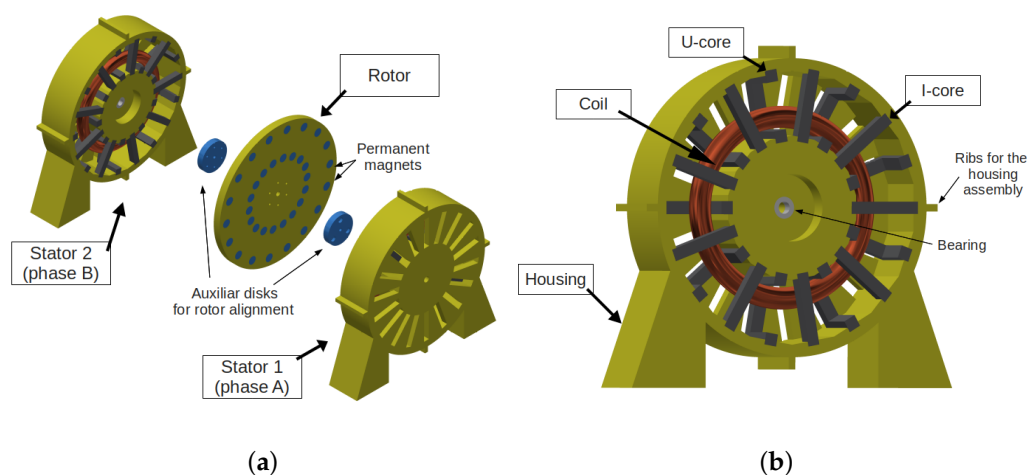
CAD model of the proposed machine: (a) exploded view and (b) stator detail.
